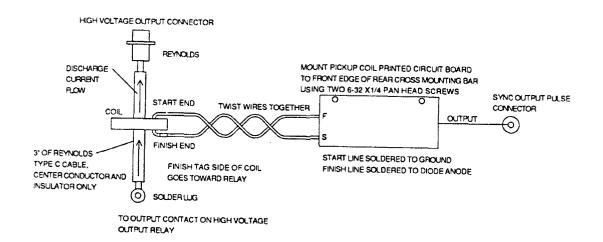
PICKUP COIL FABRICATION AND INSTALLATION
